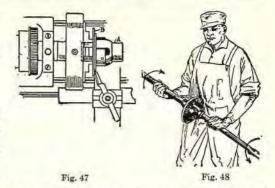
Breakage of the ring gear usually springs the differential housing flange. By catching the entire housing in the lathe and trueing it up by the surface (A), the ring gear seat (B) may be refaced with a light cut.
